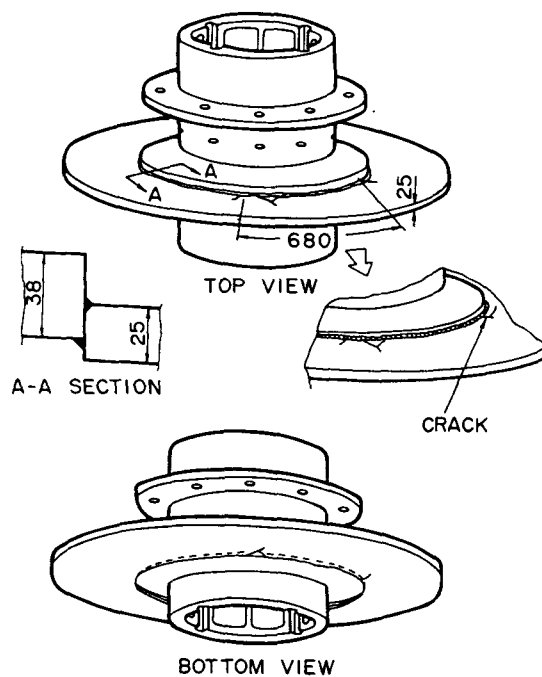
Fatigue cracks in welds of bearing ring plate.
